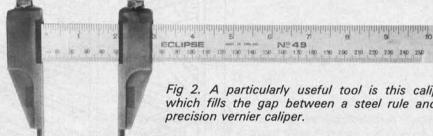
A particularly useful tool is this caliper which fills the gap between a steel rule and a precision vernier caliper.
